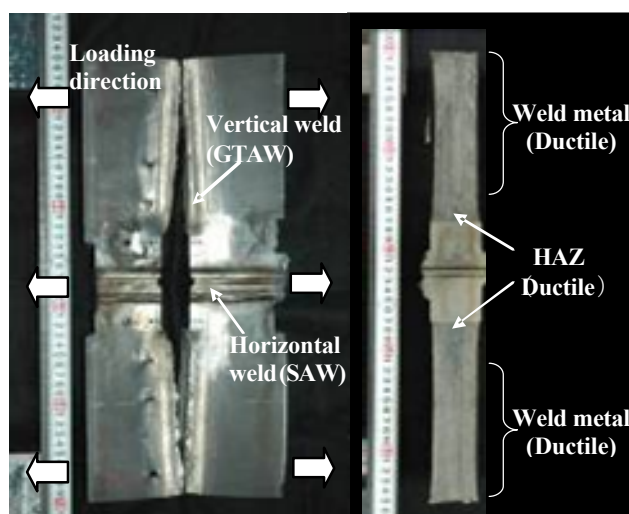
Fracture path and fracture surface of cross weld notch wide plate test (50mm thick, GTAW)
